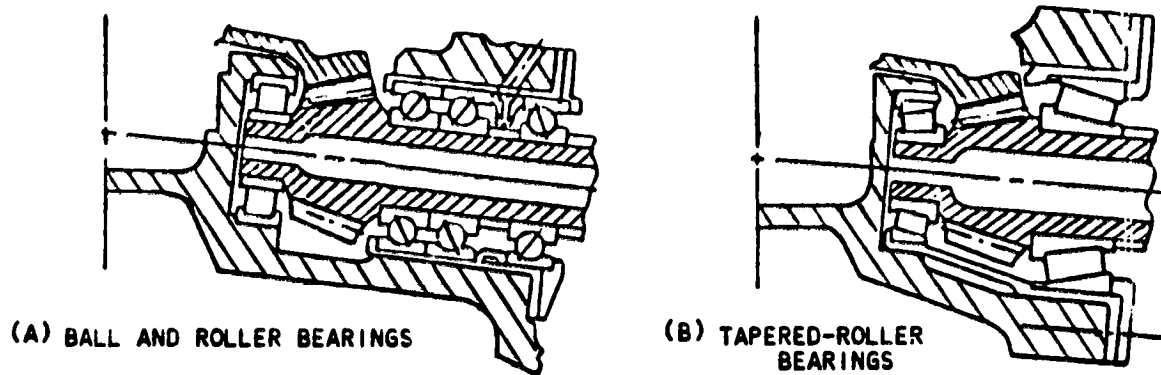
TAPERED-ROLLER BEARINGS REPLACE BALL AND CYLINDRICAL ROLLER BEARINGS ON INPUT PINION FOR HELICOPTER TRANSMISSION.
